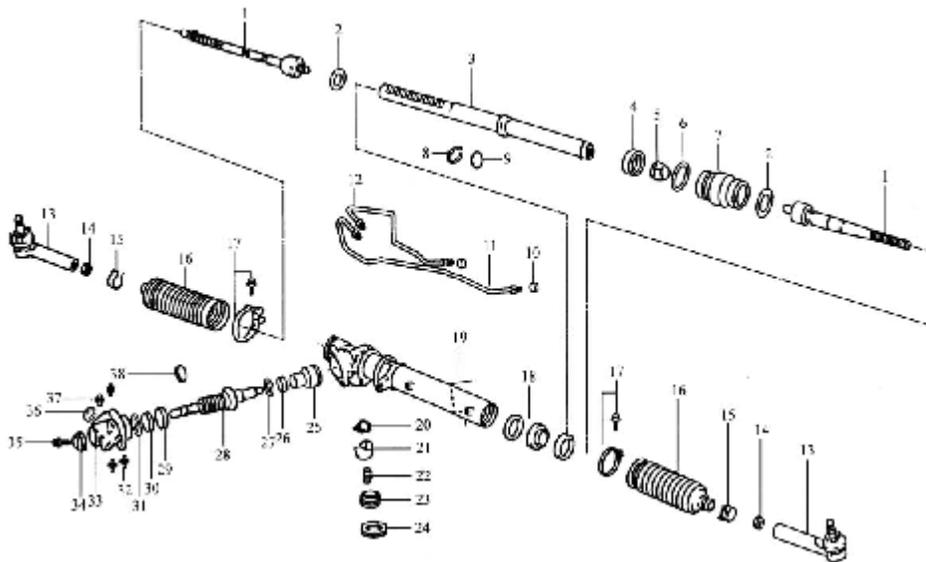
Steering Gear-3 (Power Steering Gear)
